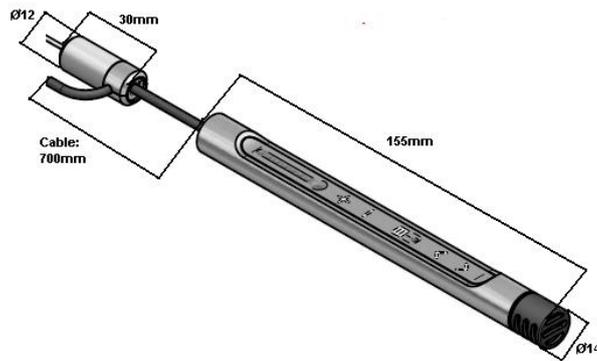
Mechanical dimensions of Reed panel (155 x Ø14 mm)
